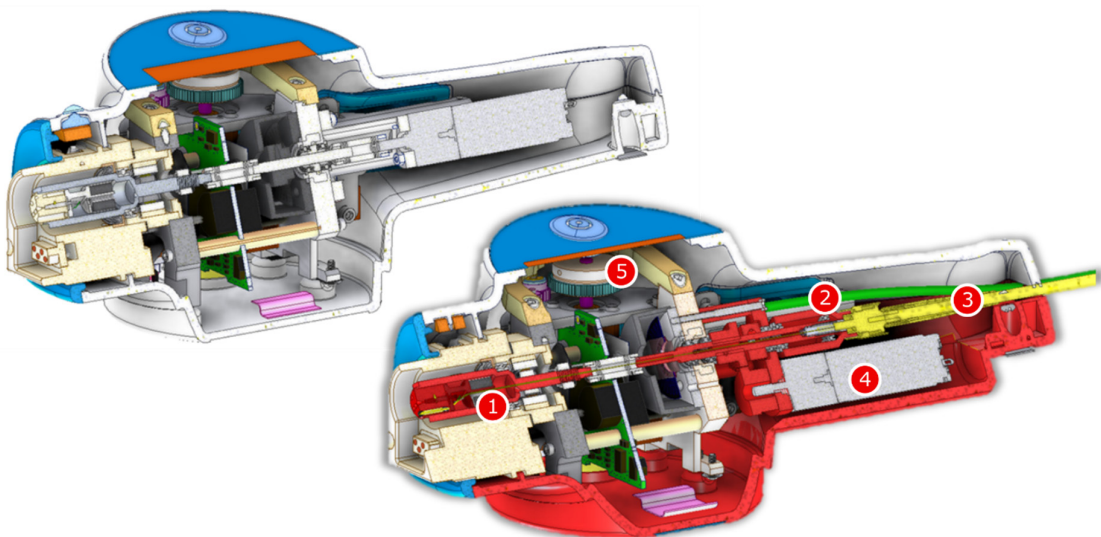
MDU modifications. Left: original motor drive unit (MDU). Right: modified MDU. Parts modified to integrate an optical channel with rotary joint are highlighted in red.
